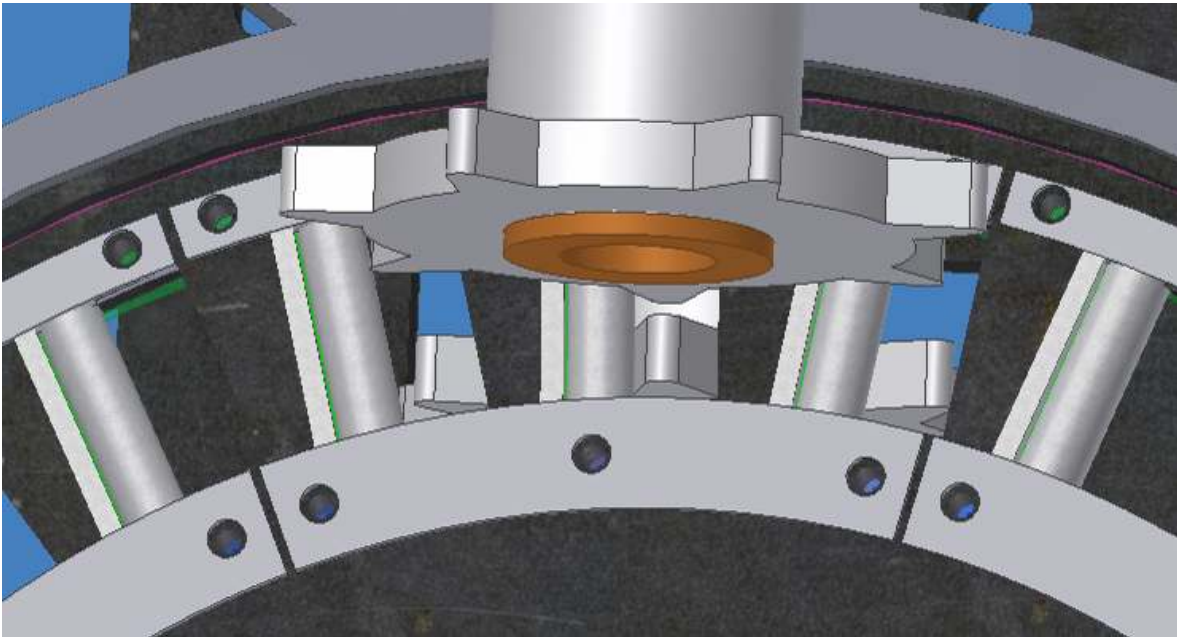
Autodesk Drawing of Gear Configuration on New Wheel Design
